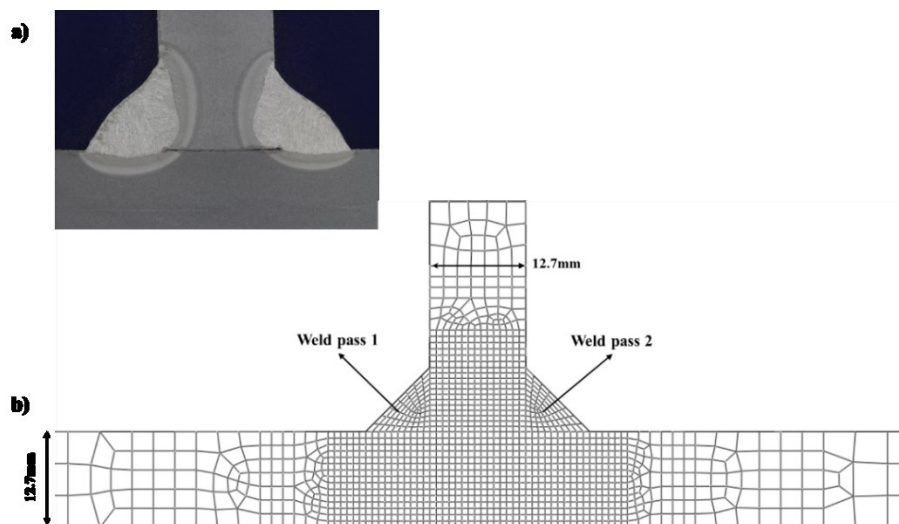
Weld cross section macrographs from fillet welded plate: a) Photograph of the macrograph and, b) weld cross section used in the FEA model.
